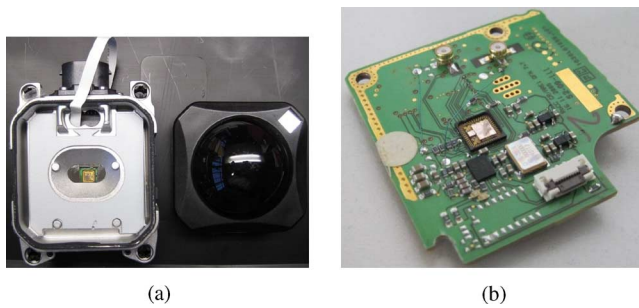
Antenna on-chip demonstrator. (a) LRR3 sensor housing, (b) PCB module with QFN package containing antenna on-chip.
